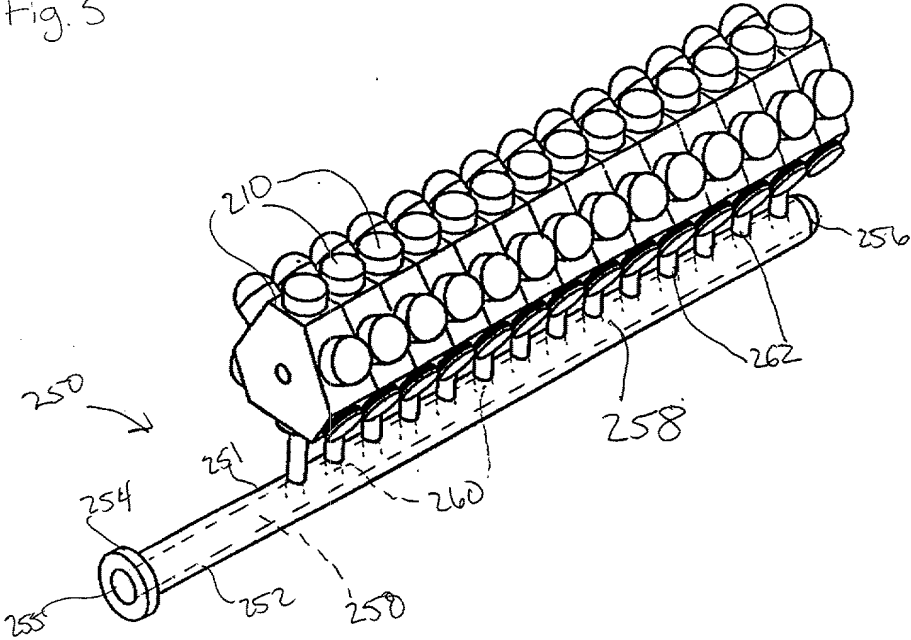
is a perspective view of a mechanical assembly 250, showing a cylindrical body 252 with a flange 254 at one end. A series of protrusions 256 are arranged along the length of the body. A top cover 210 is mounted on the body, secured by a series of fasteners 258. A dashed line 260 indicates a longitudinal section or internal feature.
